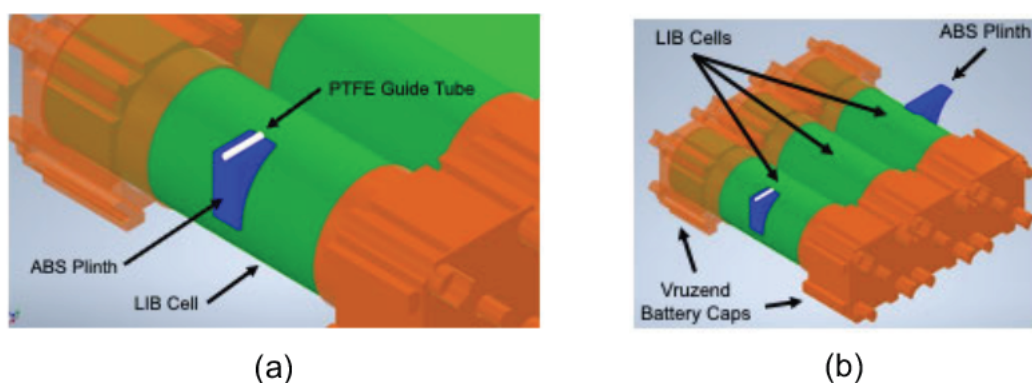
Guide Tube Mounting Method; (a) ABS Plinth and PTFE Guide Tube Assembly (b) view of the whole assembly.
